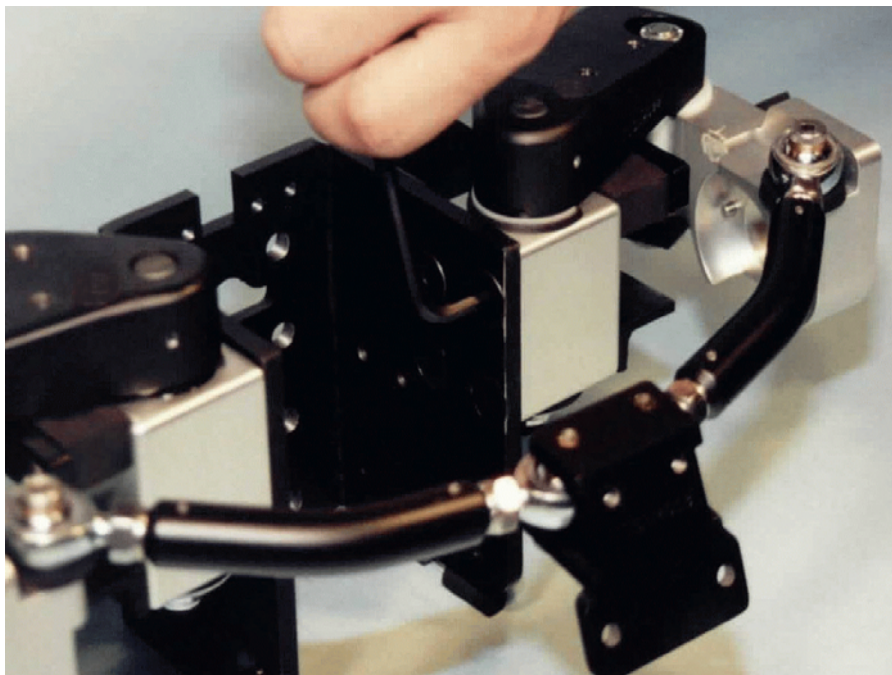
Shoulder assembly mounted on the UTS weldment
